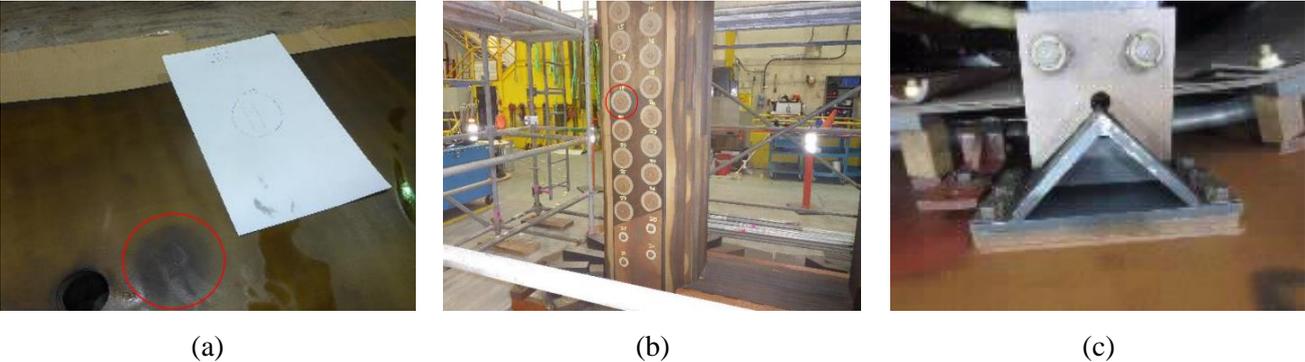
Insulation failures (a) top yoke core sheets, (b) core clamp bolts, (c) metallic structure to tank.
